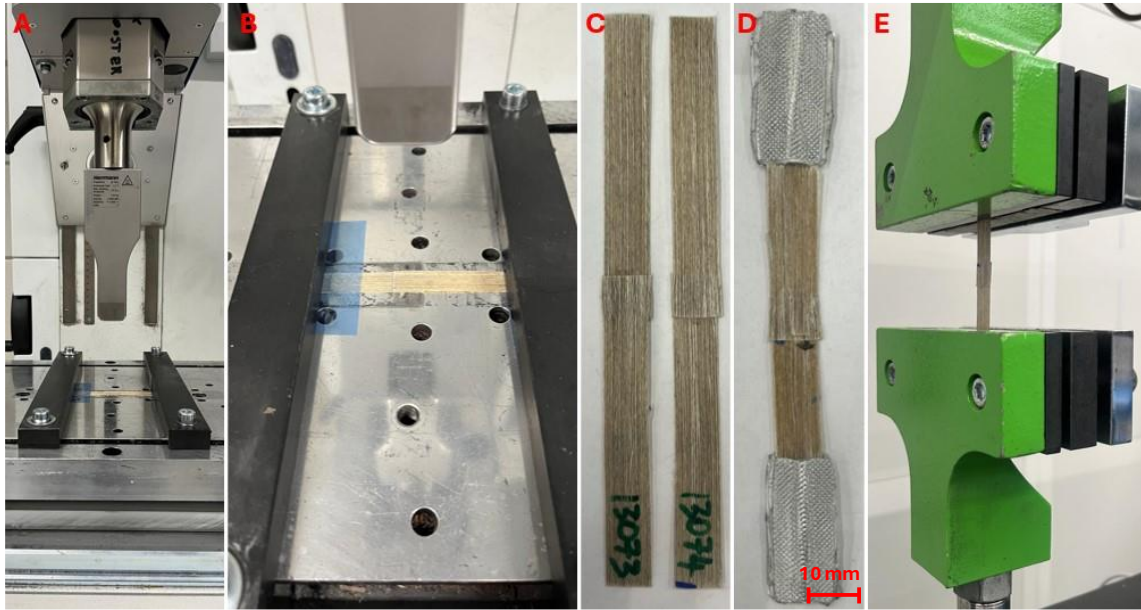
(a,b) Photos of the flax tapes clamped down in the ultrasonic welding machine. (c) Photo of two ultrasonic welded samples before testing. (d) Photo of an ultrasonic welded sample with aluminium supports on the extremities, to ensure good clamping in the tensile machine. (e) USW sample placed in the tensile machine
